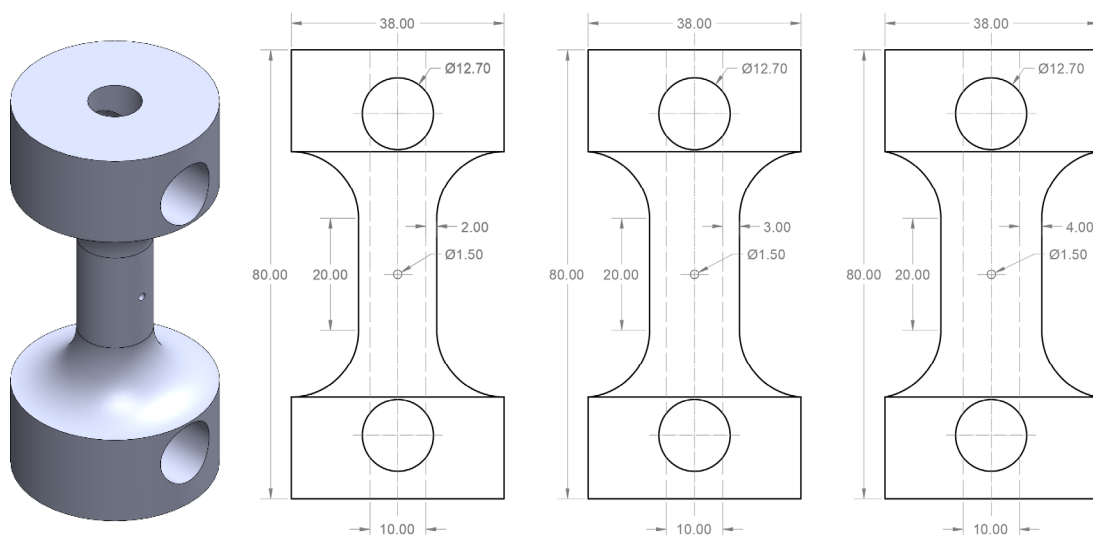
The geometry of 6061-T6 aluminum tubular specimens. Units in mm.
